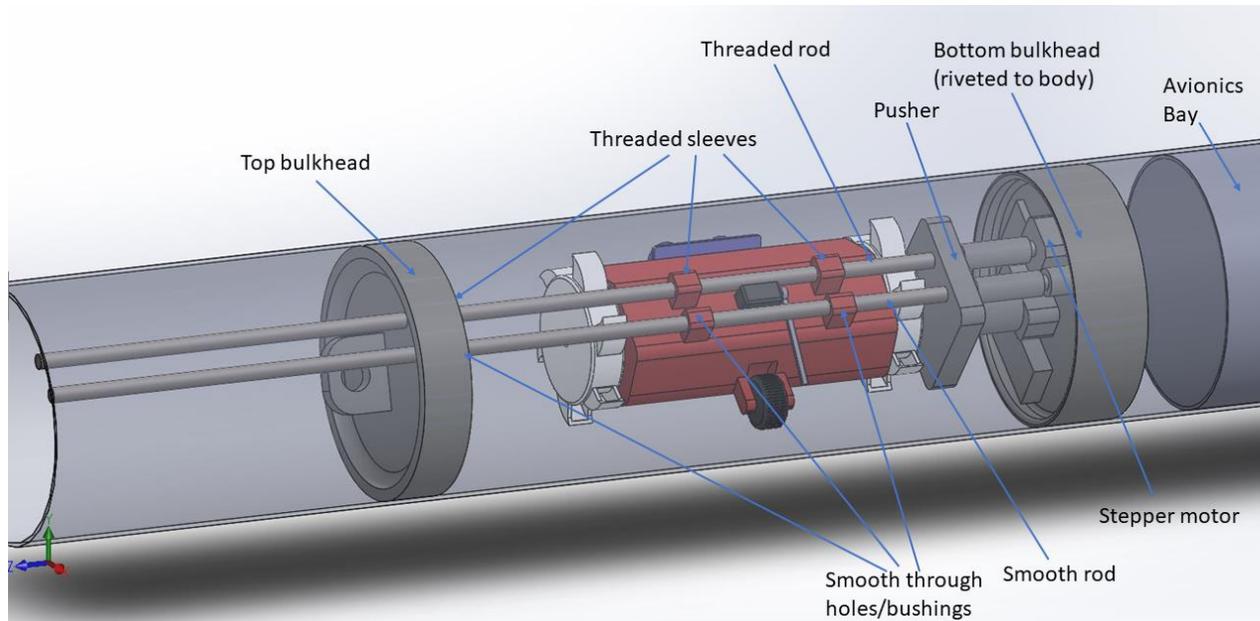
Preliminary CAD image showing the payload retention and deployment mechanism.
